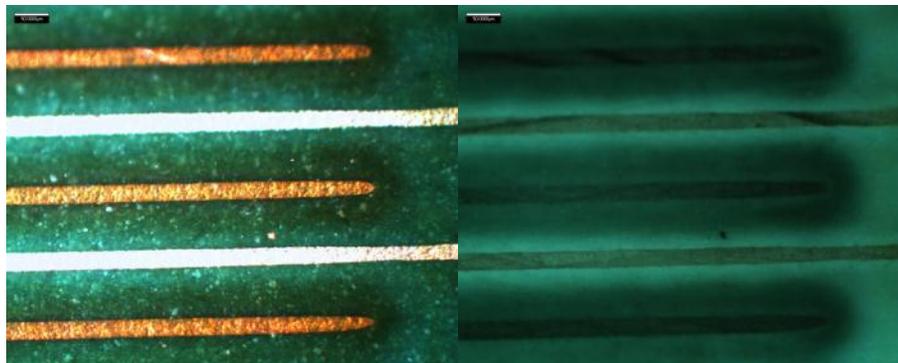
Microscopic illustration of comb structure on TV2 Layer 8, Solder mask layer removed by grinding, left view darkfield, right view with UV lamp
